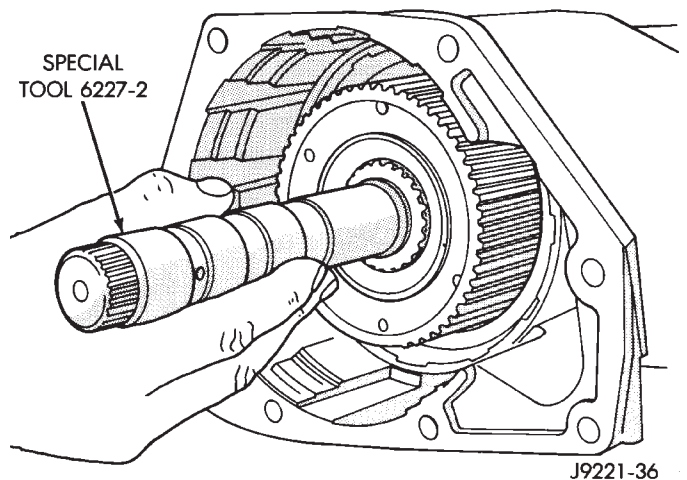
Checking Alignment Of Overdrive Planetary Gear And Overrunning Clutch Splines
